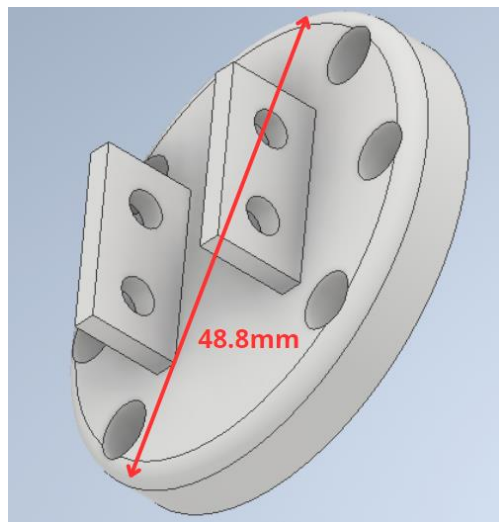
Old connector for the flange of a KUKA KR16 robot.
